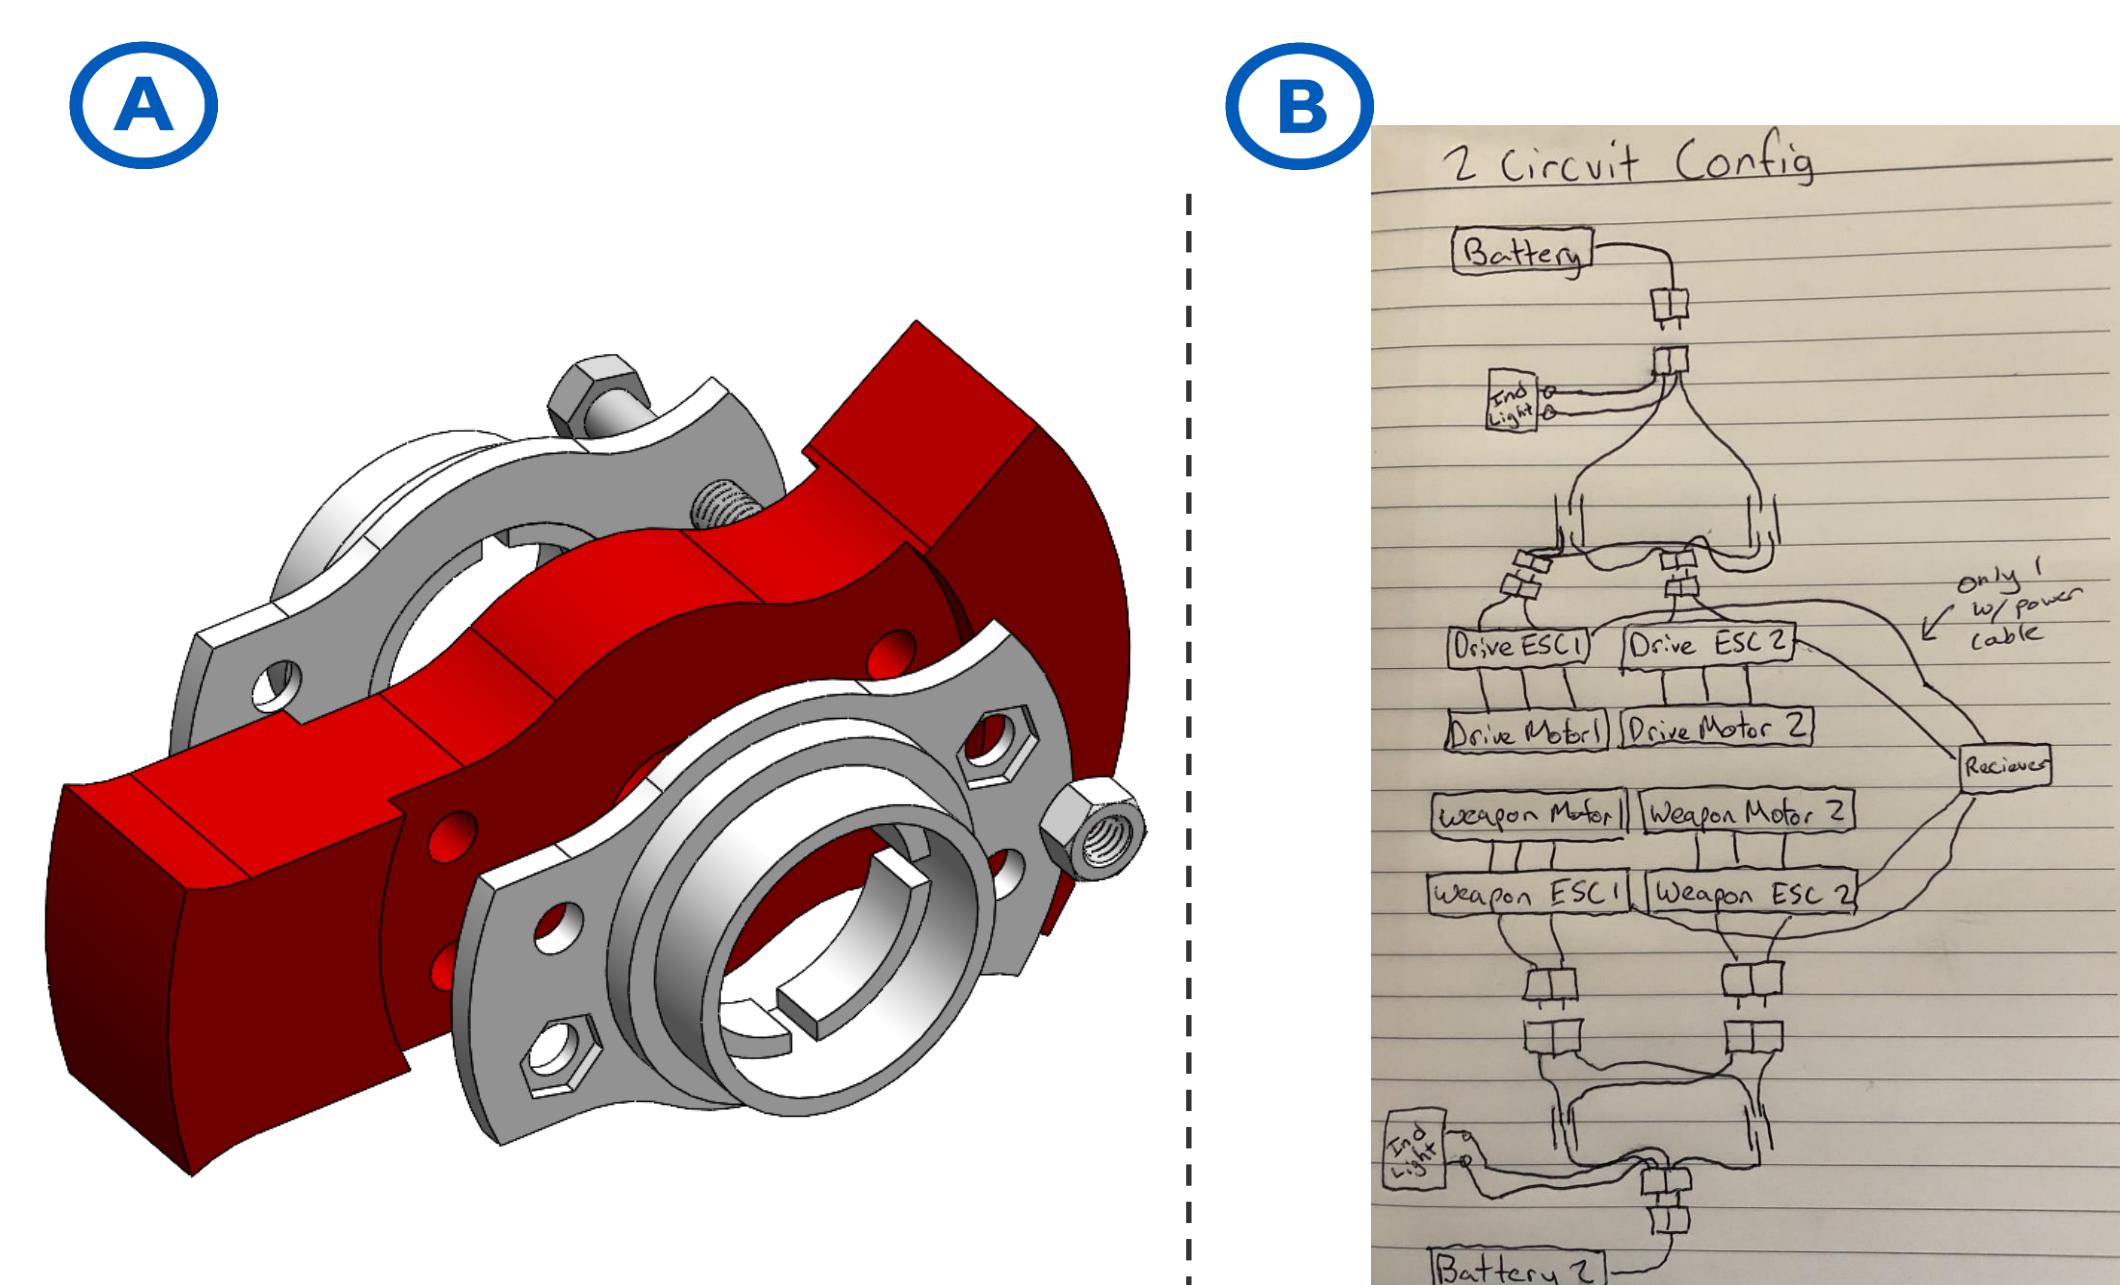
The Big Gig Weapon Assembly (A) and Electronic Block Diagram (B)
